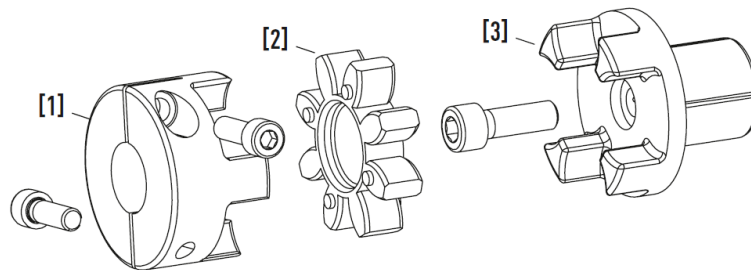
Coupling assembly variant 2: Clamping hub with two clamping bolts
